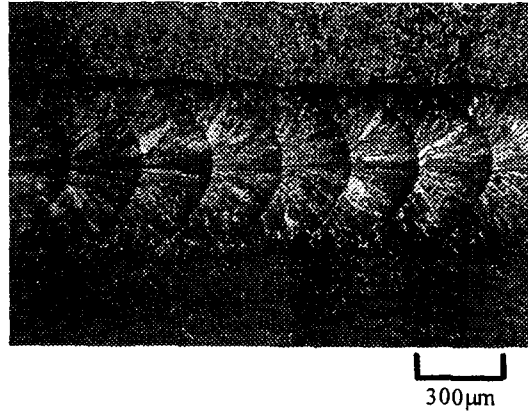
Macrography of Al 3003 butt welding by Nd:YAG laser
